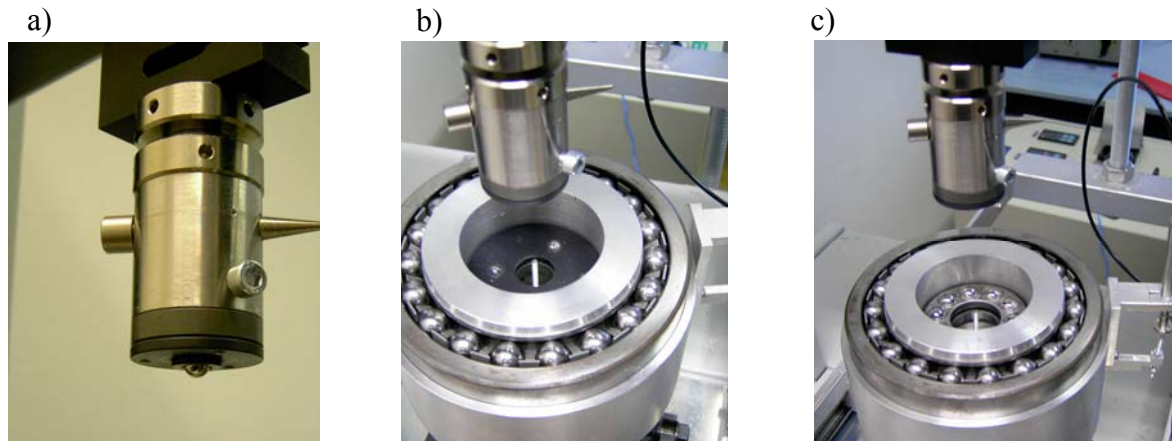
Construction details of measuring equipment: a) upper jaw with loading ball, b) three balls support, c) ring of balls support
